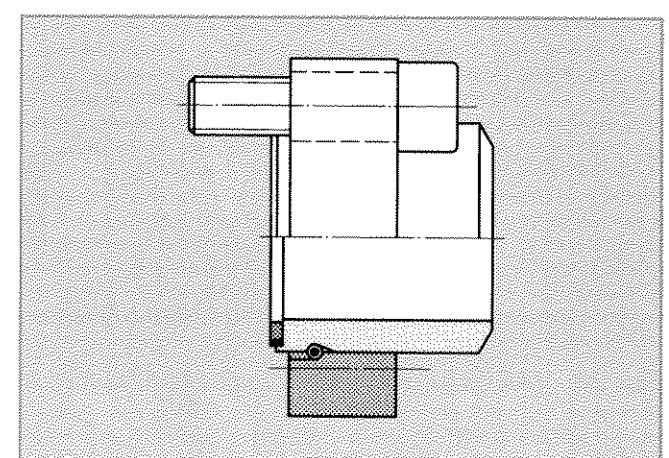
GS Hydro flange joint, sealing by USIT ring, securing function by spiral spring and screws, thicker pipe walls and machining of pipe ends needed
